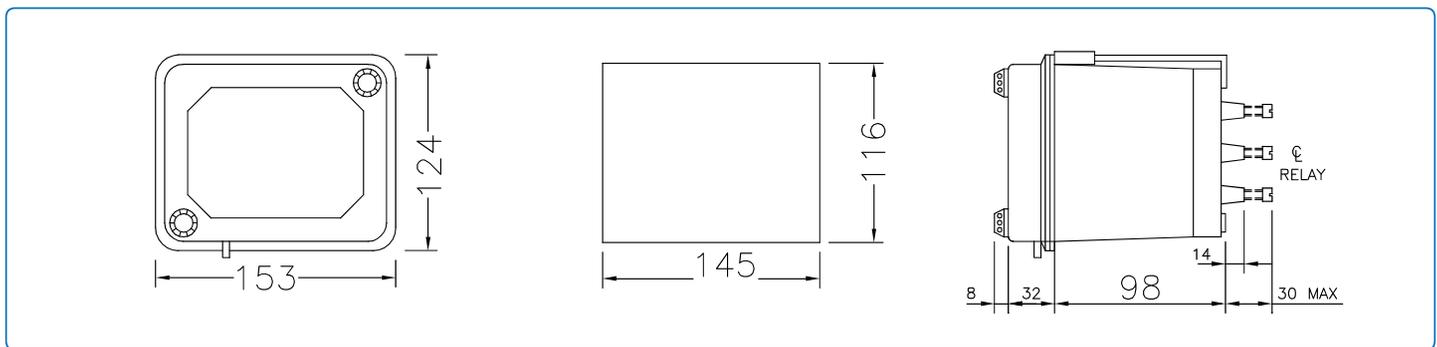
Case and Panel cut-out dimensions for case 1/2N (all dimensions in mm)
